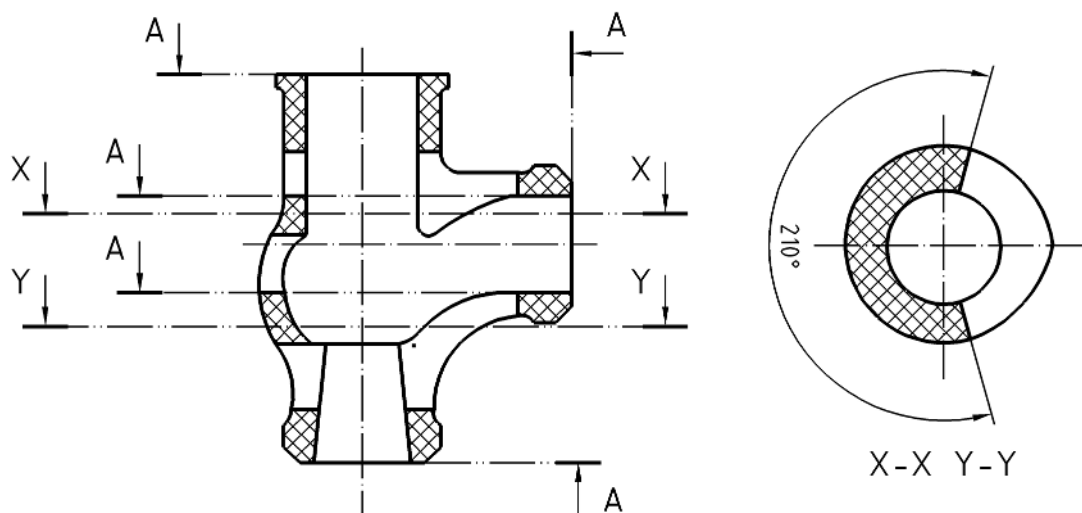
Typical casting section showing required radiographic examination of angle valve body (pressure seal bonnet)
